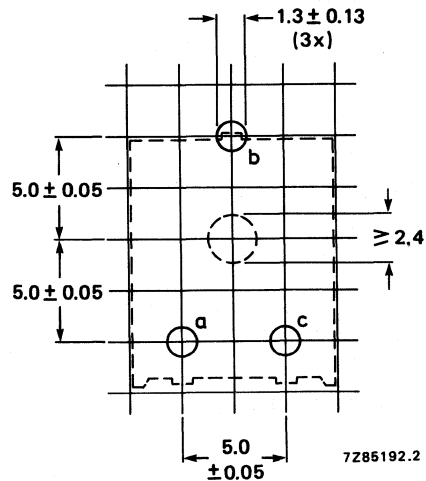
Hole pattern for horizontal versions, viewed from component side.
